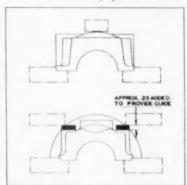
Means for guiding bearing cap assembly-A through transfer machine (top); compared with guiding means for bearing cap assembly-B, (below).
